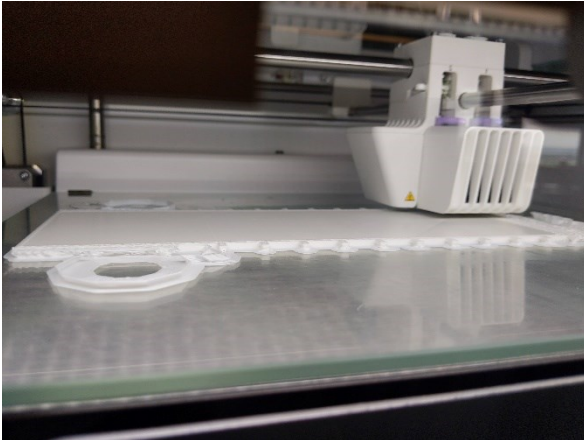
The Ultimaker S5 3D printing the base layer of one of the manifold side inlet parts
